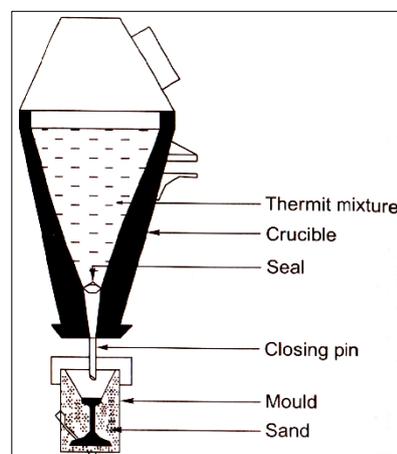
Thermite welding equipment (synthetized)
